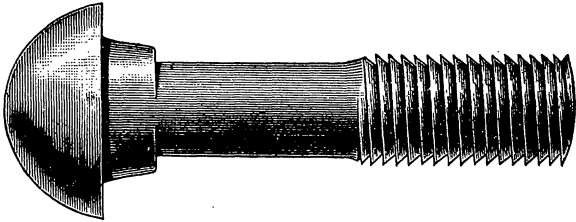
Soft Steel Track Bolt with Raised Thread.
